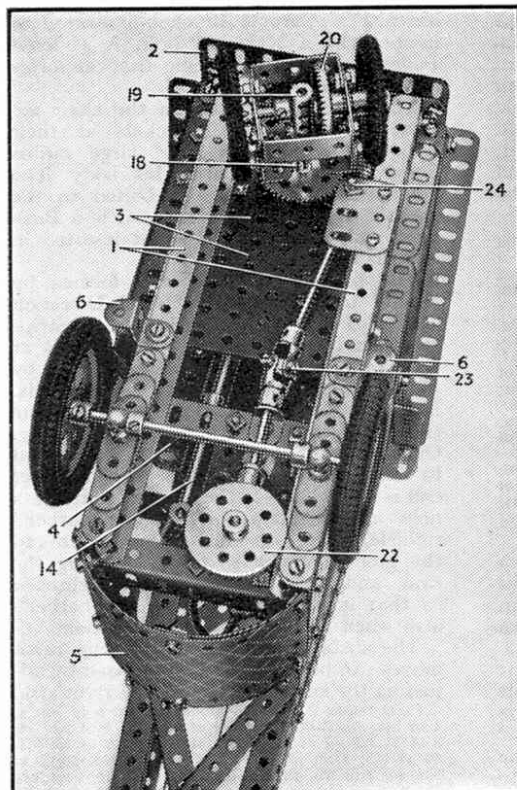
An underneath view of the Electric Mobile Crane, showing the castor and steering mechanism.
